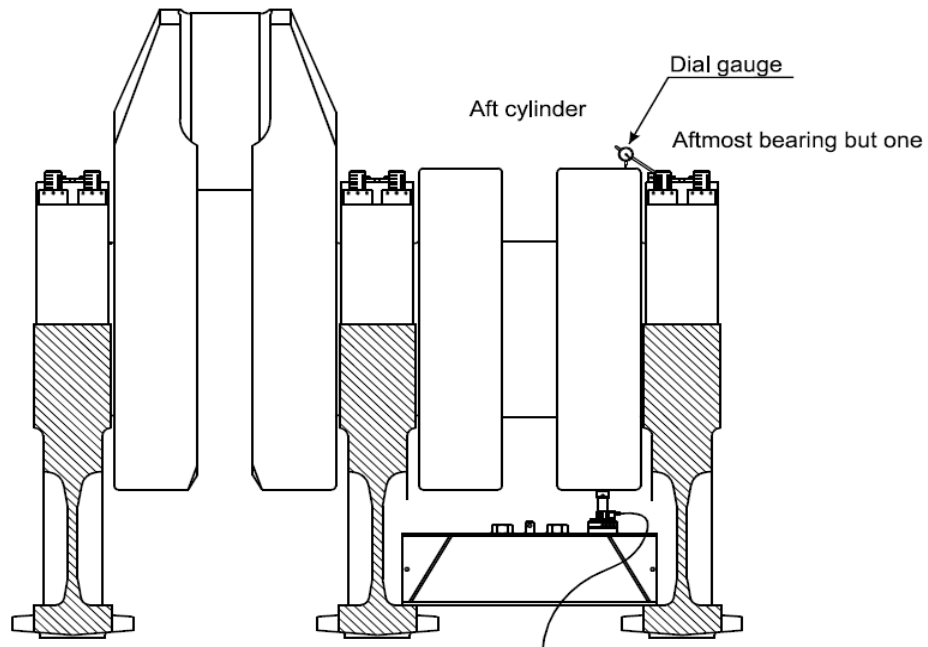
Jack-up measurement of bearing reactions inside diesel engine
